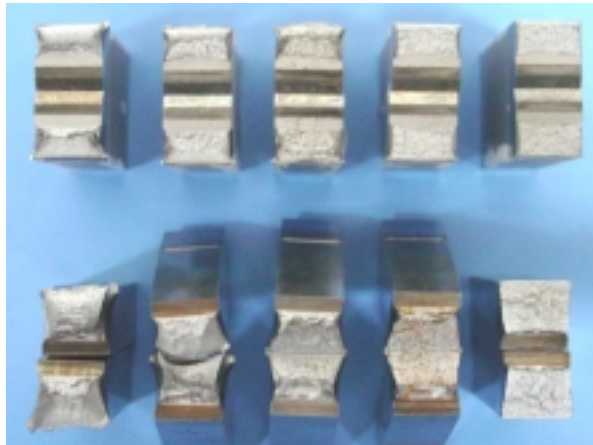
Fractured surface. Upper line : pre-cracked specimens,
